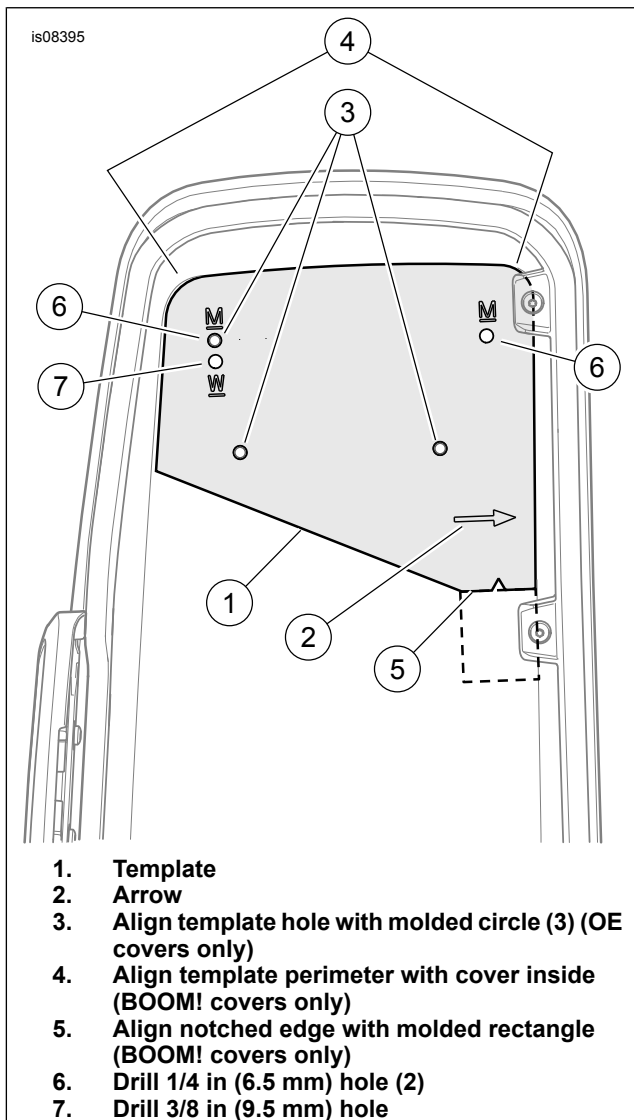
Drill Holes in Saddlebag Cover (Left Shown)
